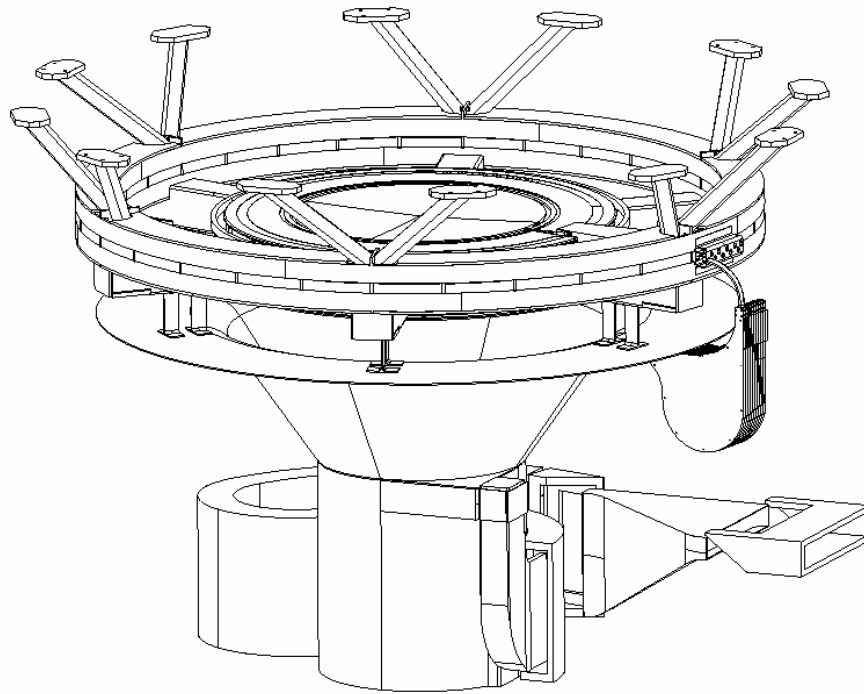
Fiber routing from the focal surface to its exit from the fiber positioner. The upper portion of the fiber positioner containing the mounting flange and positioning robots is removed for clarity.
